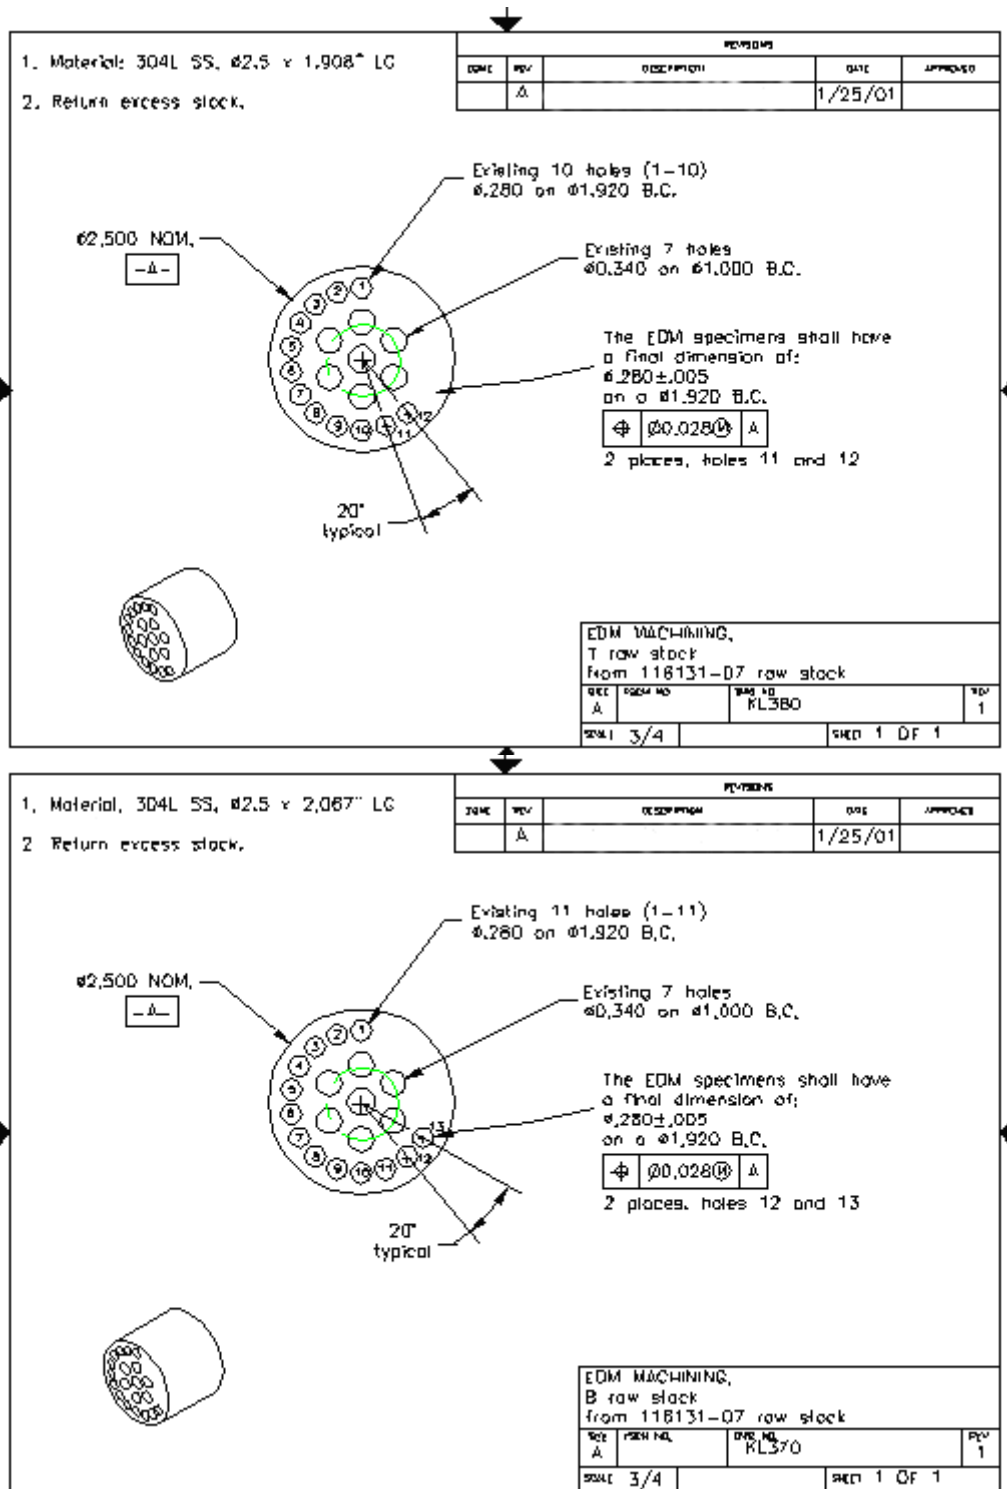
EDM cylinder removal drawings from 2.5 inch diameter 304L bar stock.
